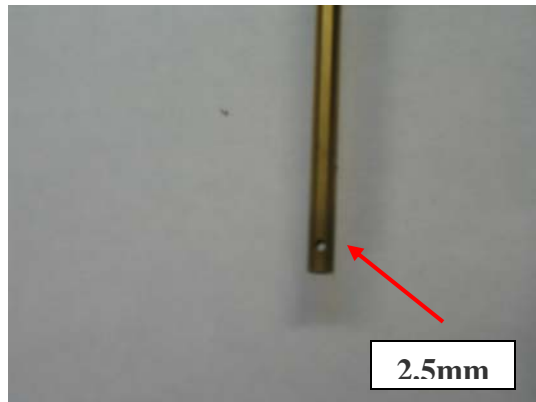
Lower opening of 2.5mm to screw the spindle to the rigid rod
